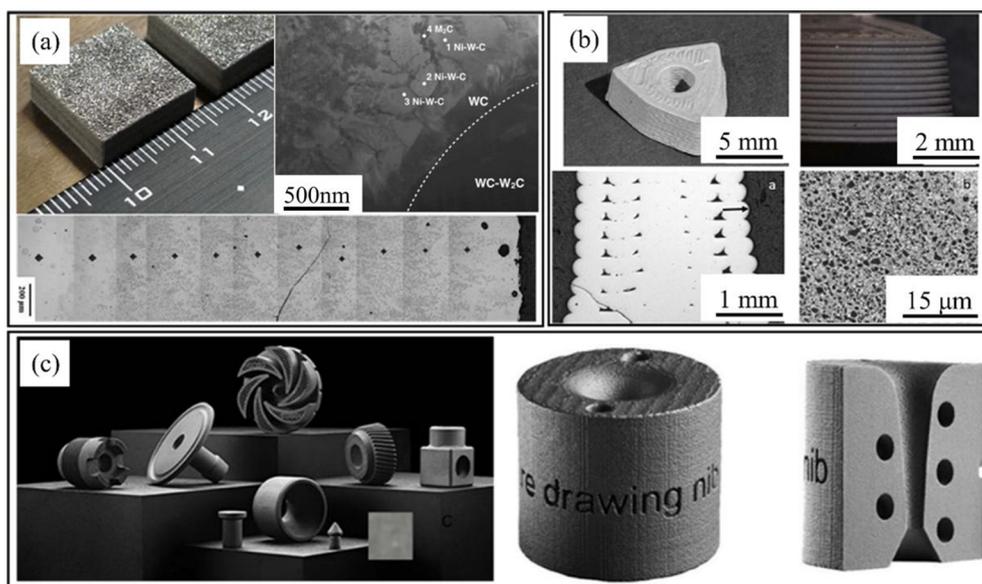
Cemented carbides fabricated by additive manufacturing technology: (a) Sample fabricated by SLS [18]; (b) Samples fabricated by FDM [16]; (c) Samples fabricated by BJP [53]
